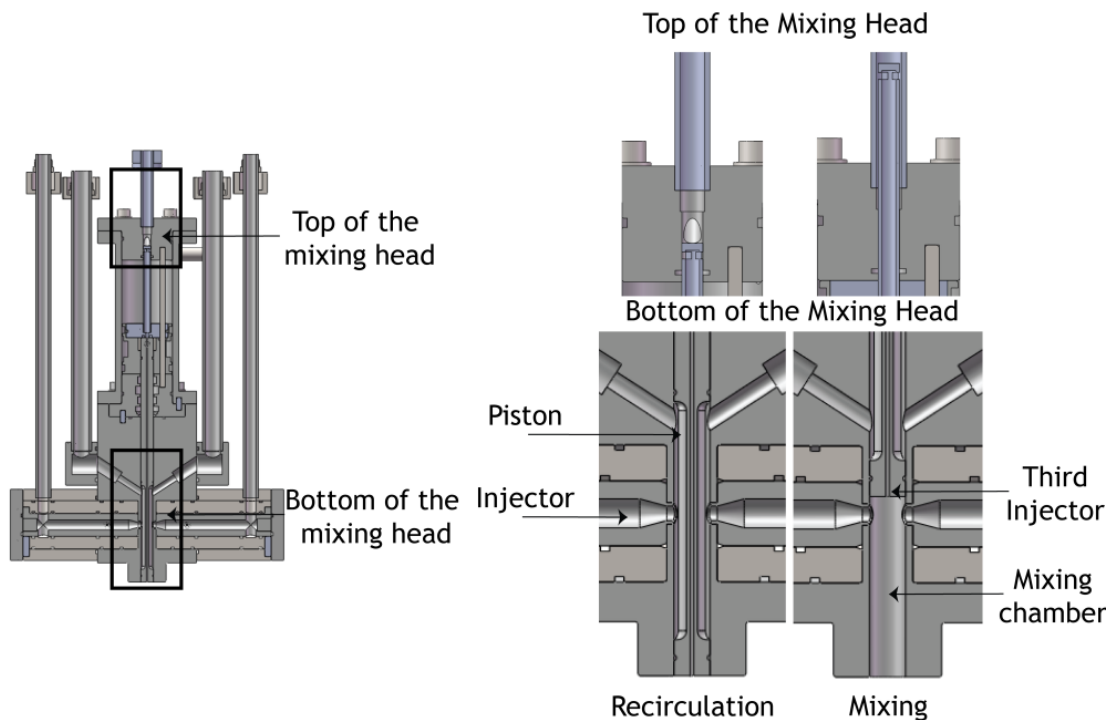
Scheme of the RIMcop® mixing head prototype.
